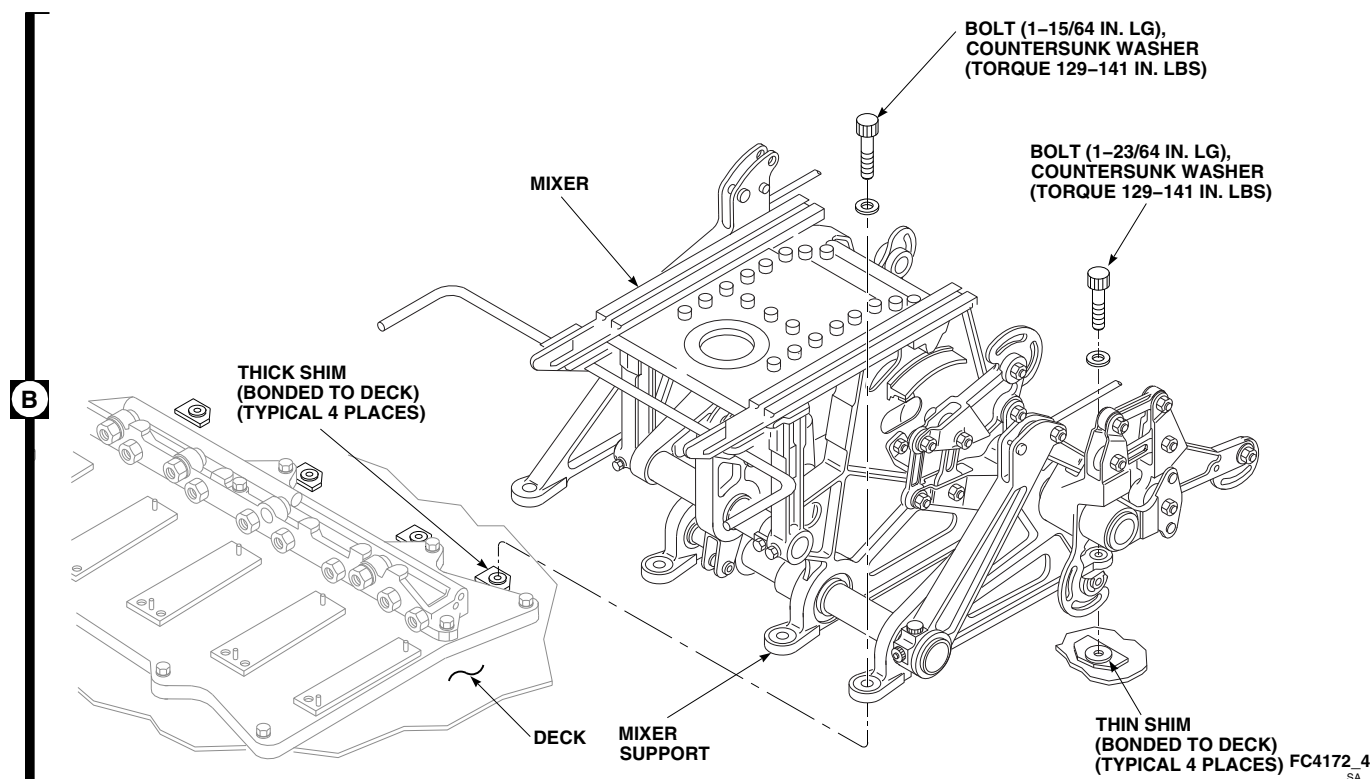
REPLACE MIXER (SHEET 3 OF 3)
